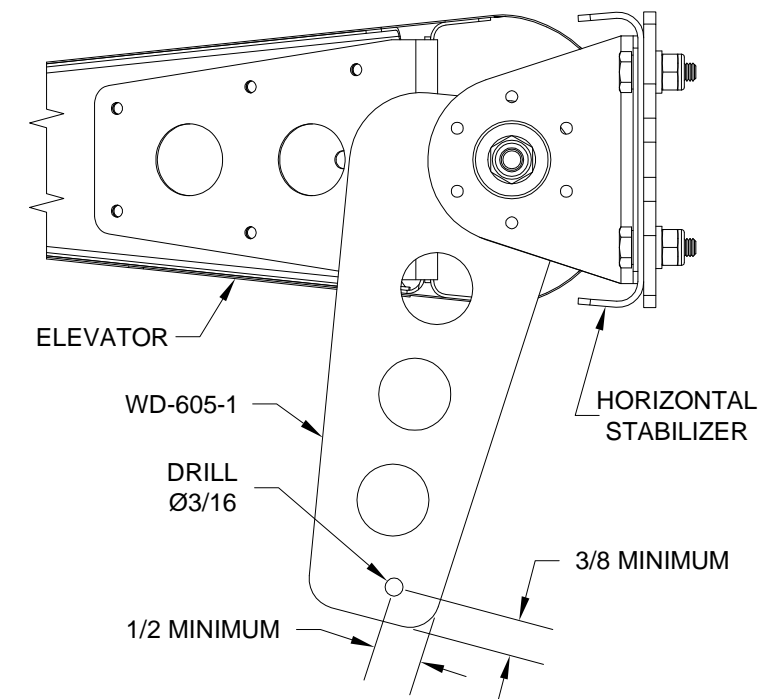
ELEVATOR PUSHROD BOLT HOLE
